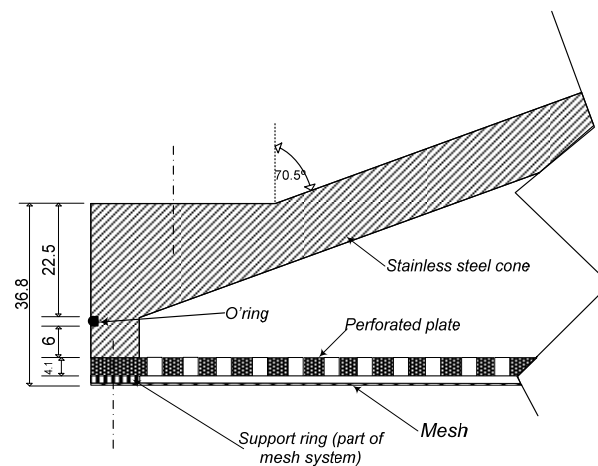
MAPC top section: symmetrical cut which shows the single o-rings arrangement (all units in millimetres).
